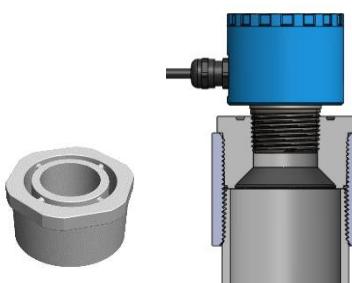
P/N TM3216 (left) and in a stilling well (right)
